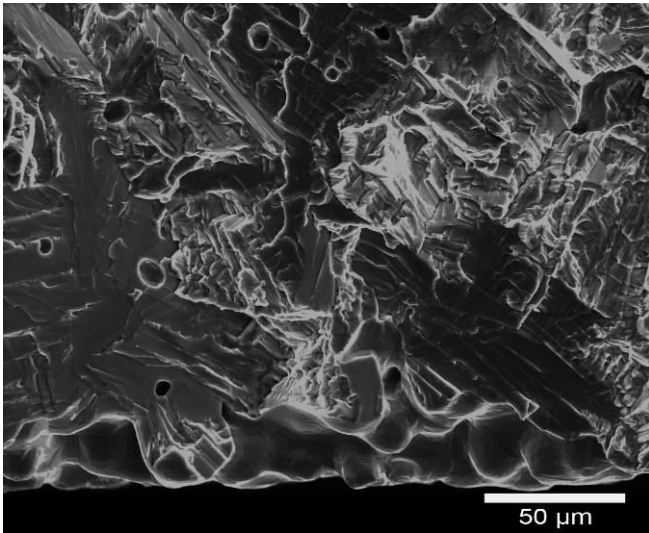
Typical fracture surface of MIM31L samples.
